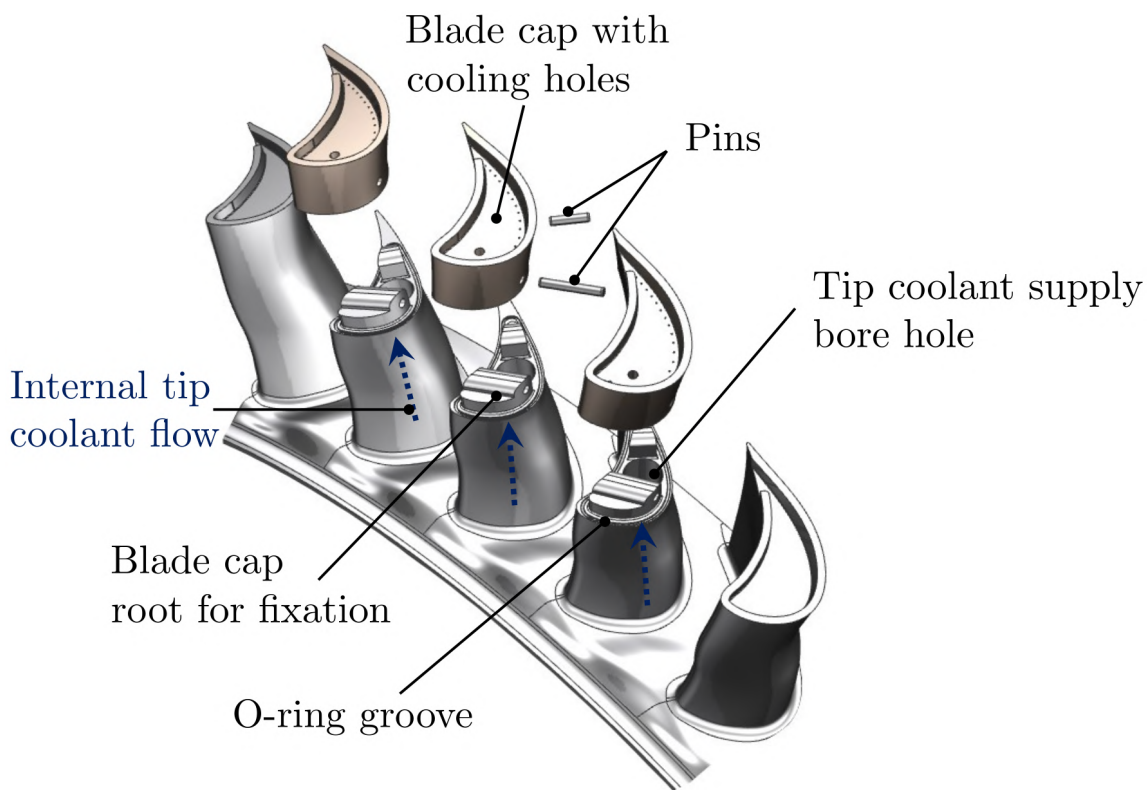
Representation of modular tip coolant ejection rotor design for different blade tip geometries
